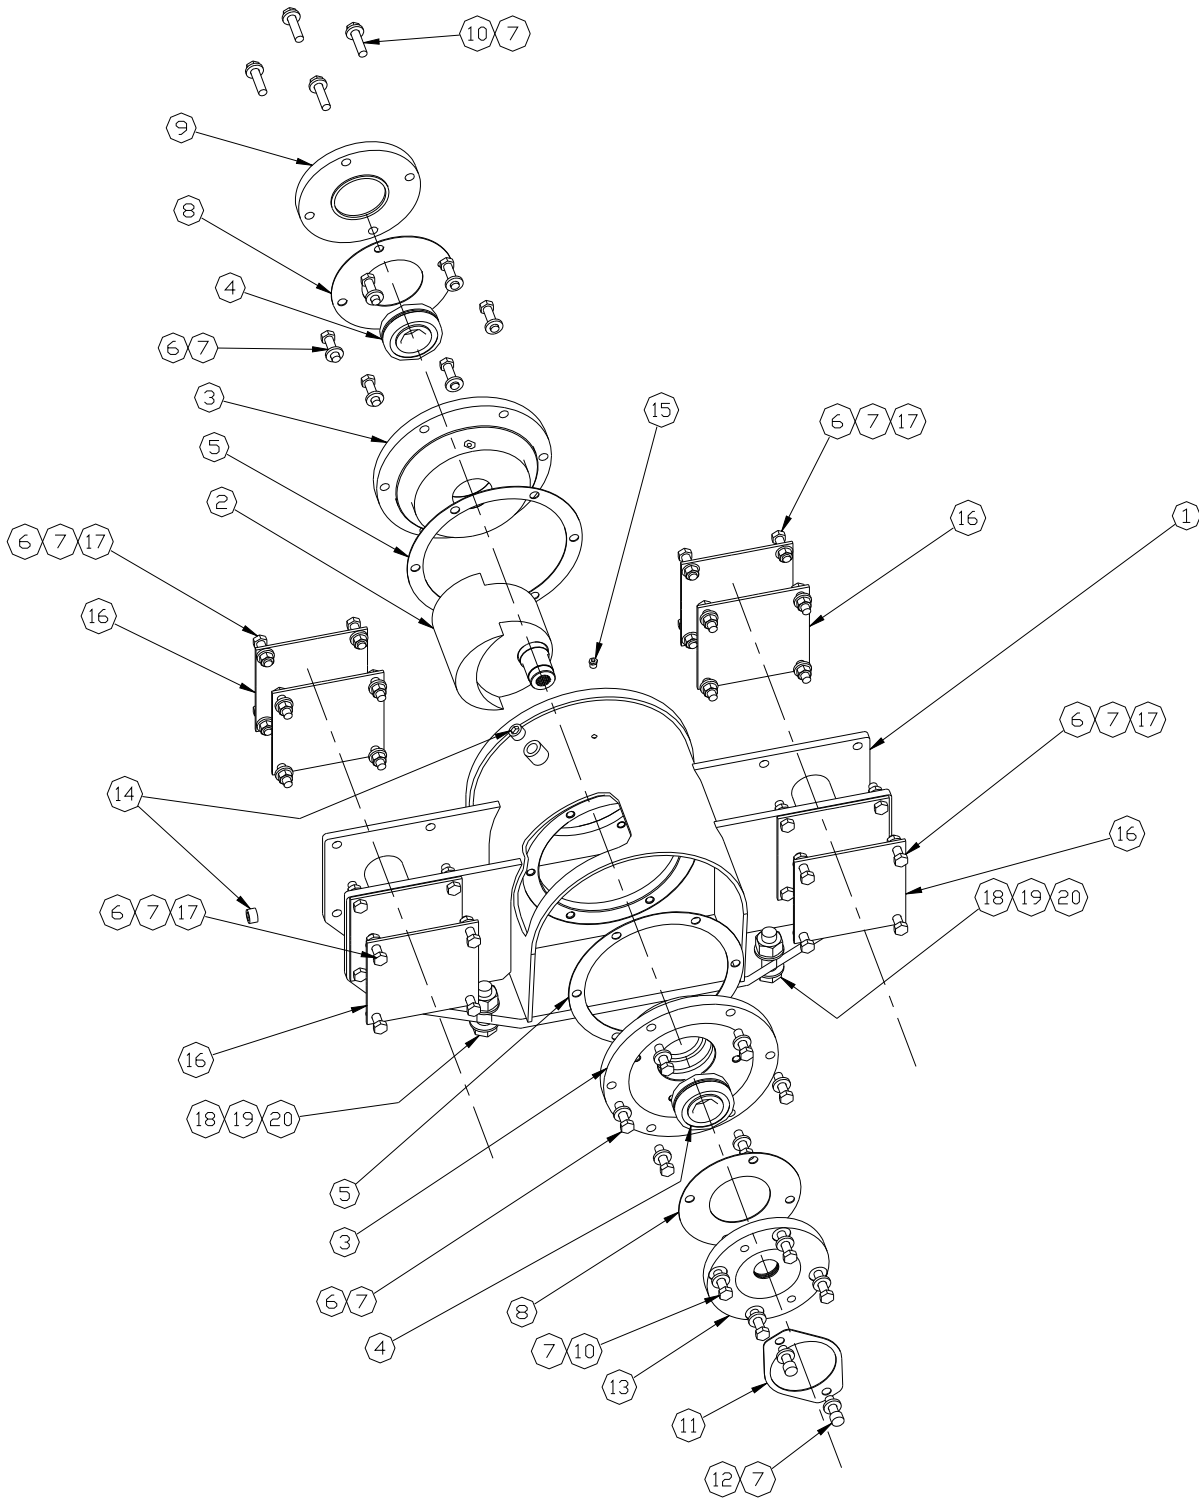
Dynamic Assembly & Suspension System (SN 1399 & below)
